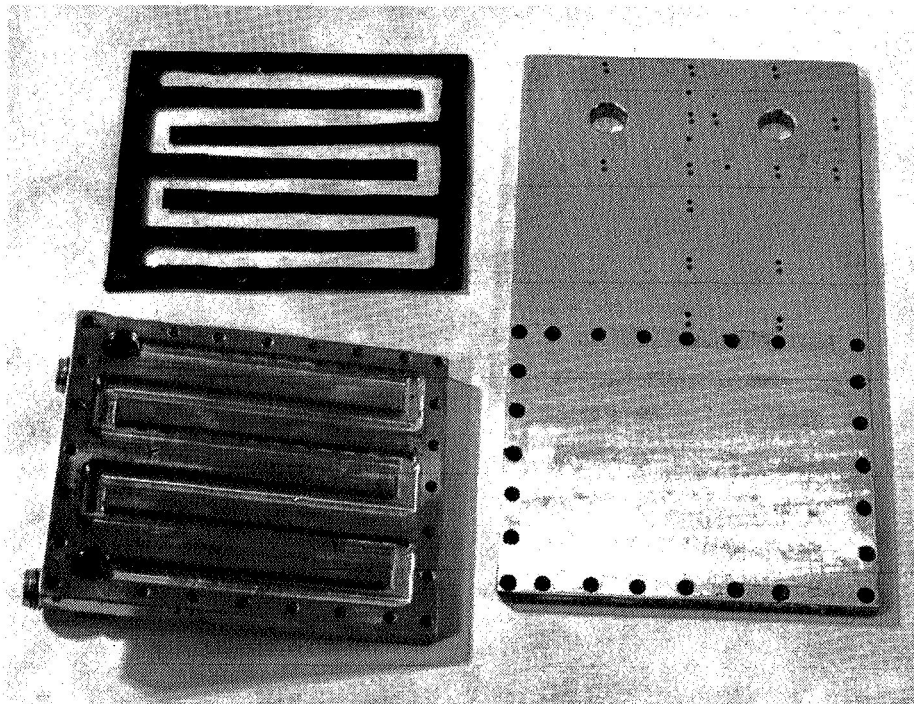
FIGURE COLD-SIDE PLATE DISASSEMBLED TO
